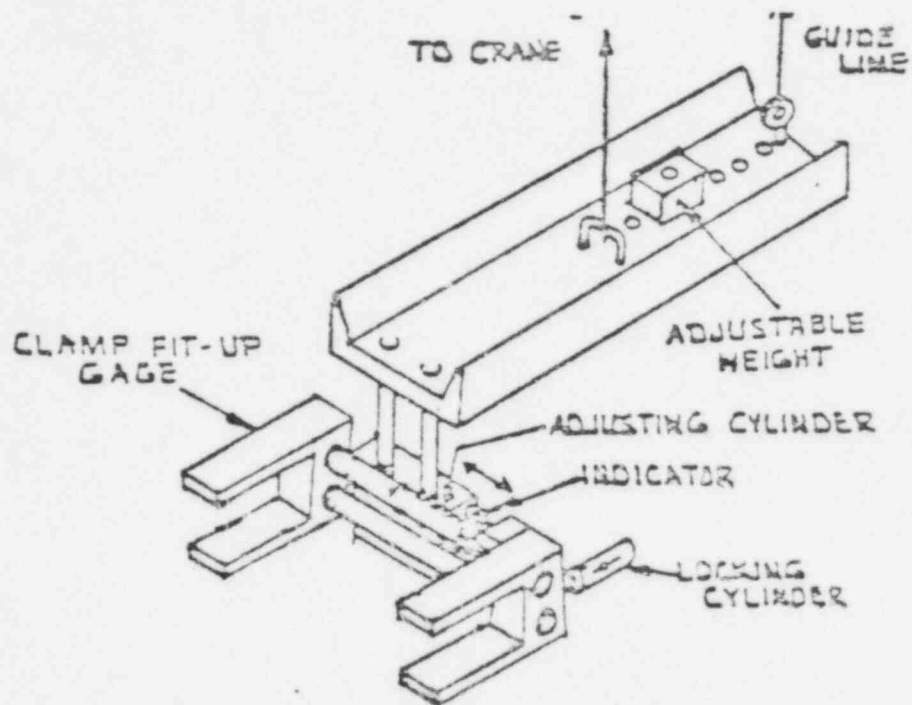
FIT-UP TOOL AND HANDLING FIXTURE
